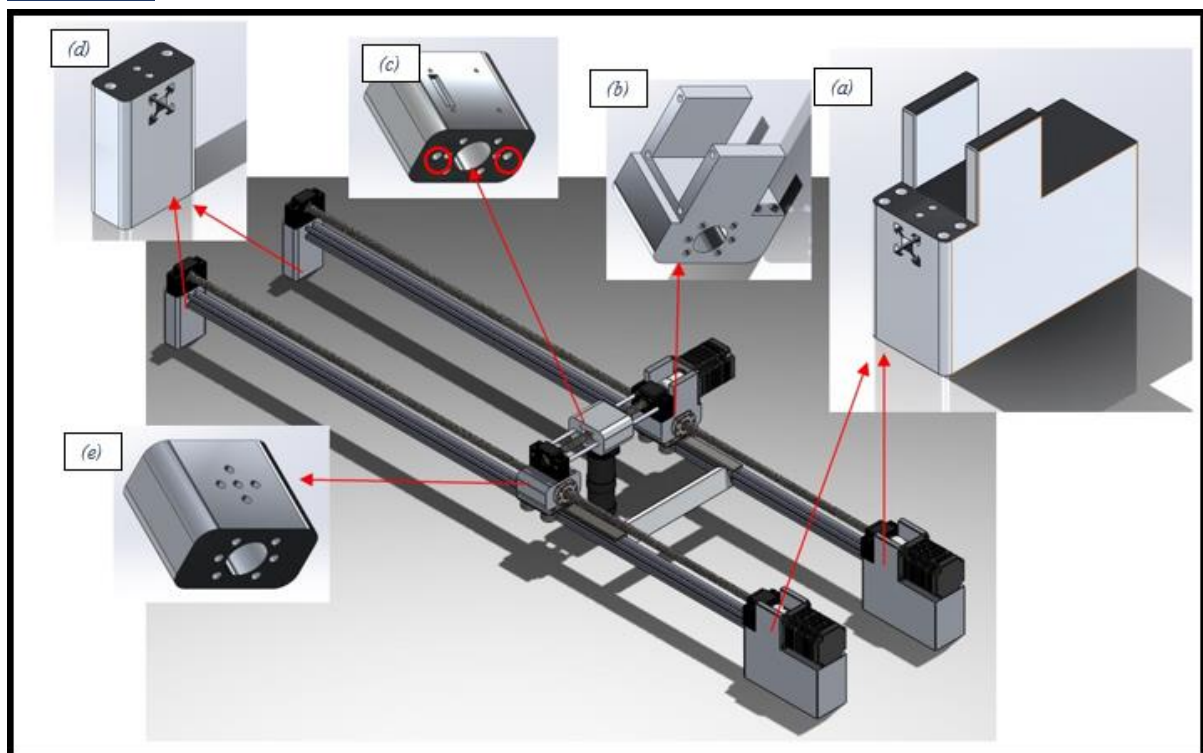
11: CAD Model of the CMM system including connector blocks and camera module.
